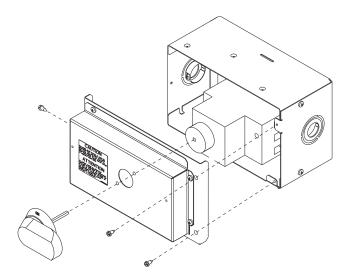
Handle and Shaft Assembly for HACR Circuit Breaker
